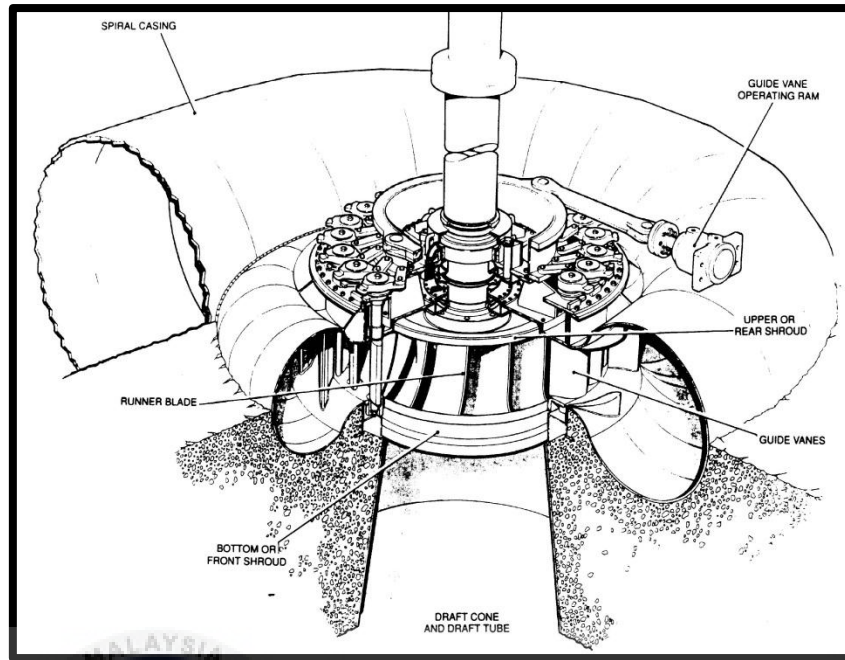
Cutaway View shows Arrangement of a Francis Turbine [8]
